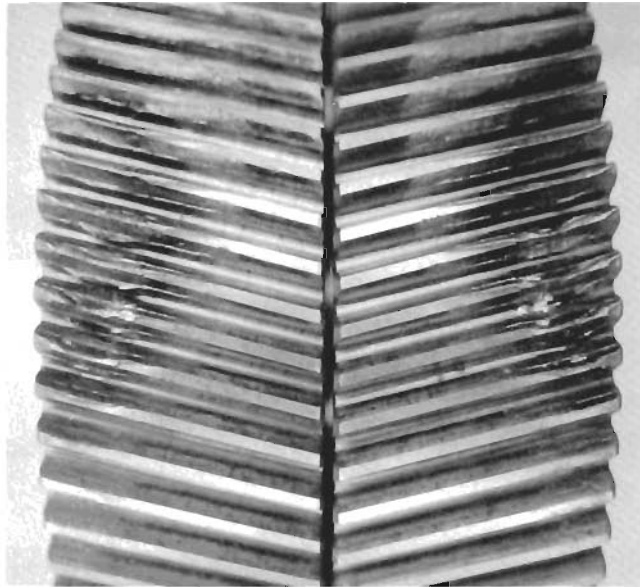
Double helical gear. Severe frictional heat developed due to runout and taper in the gear. The heated section had less than zero backlash.
